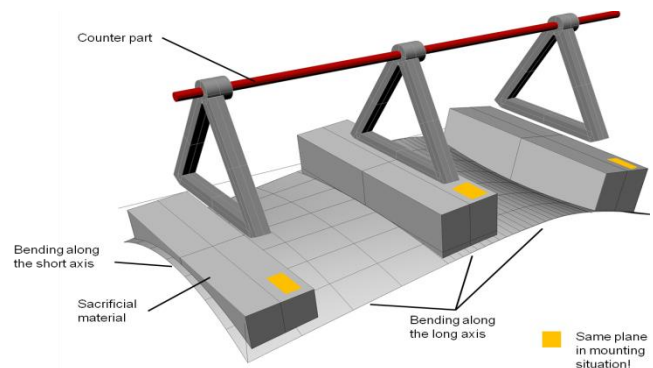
Principle of processing sacrificial material supported by Adaptive Machining.
